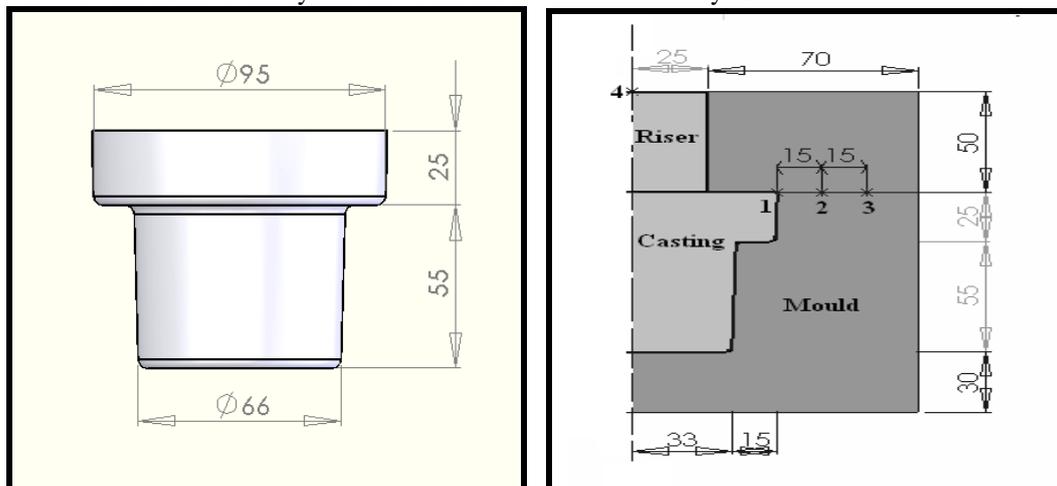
(a) Test casting with dimensions, (b) Schematic representation of the casting geometry and the selected locations for plotting temperature history.
